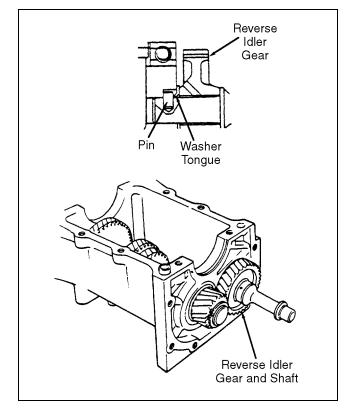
H-34. Reverse Idler Gear and Shaft Installation
